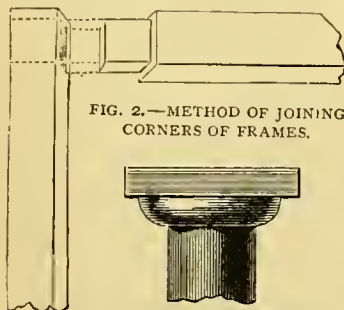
METHOD OF JOINING CORNERS OF FRAMES.
